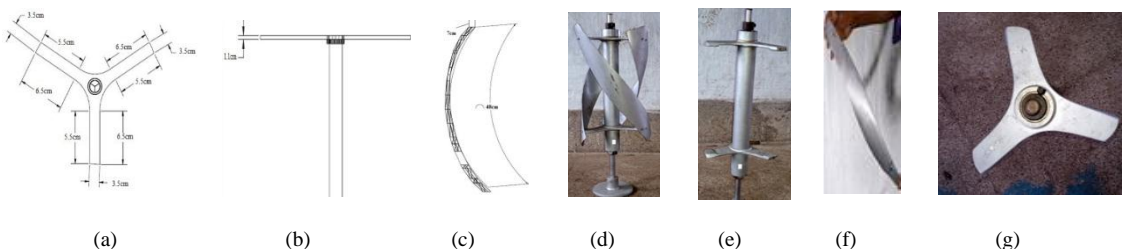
Various components of Turbine Designed: a) Rotor B) Hub thickness C) blade. Fabricated:d) VAWT, e) Rotor &shaft F) Twisted blade,e)Hub.
